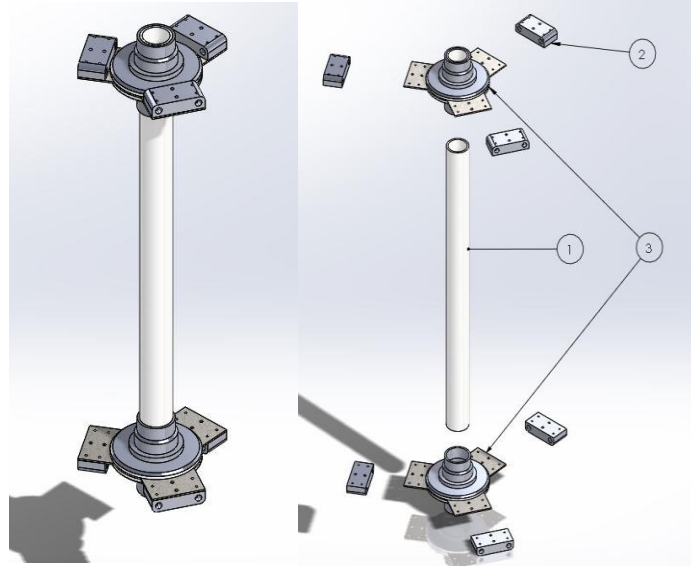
Outer shaft assembly (left) and exploded view of outer shaft assembly (right)
